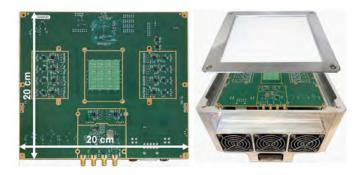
Assembled 16-tile carrier PCB (left) and radio-head enclosure for the assembled 384-element, 16-tile phased-array system (right).
